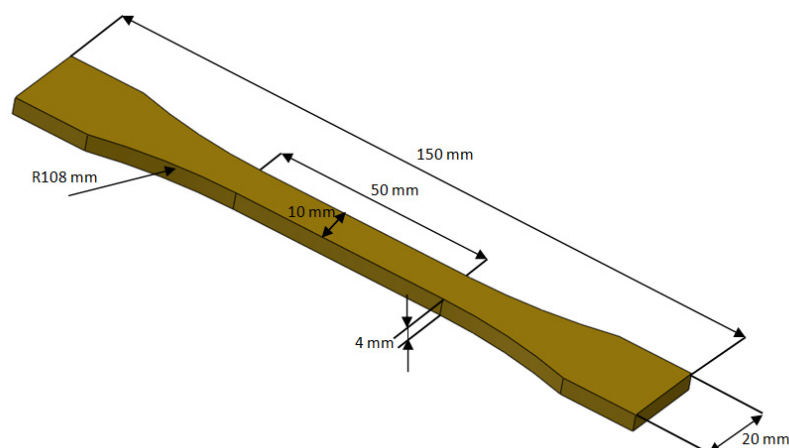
Bulk specimen geometry (all dimensions in mm).
